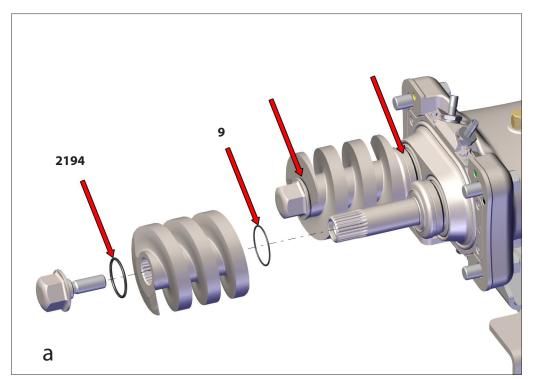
Cleaning special components: Failure of O-ring 2194 and O-ring 9 on the input and output spindles
